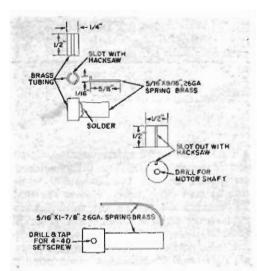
Contacts are made from strips of spring metal soldered to short lengths of tubing. Drill the rotating contact to fit snugly on the motor shaft.
